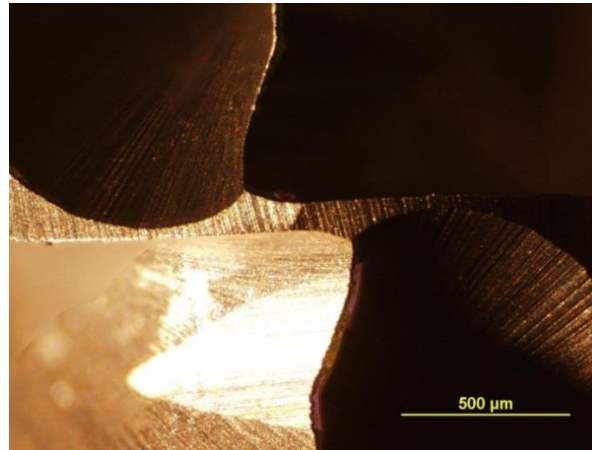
Absence of BUE and Tool Wear on the Cutting Edges of the Uncoated Ball End Mill  $\text{Ø}3.175\text{mm}$ , MQL, after Machining 10mm on 6061-T6 Aluminum Alloy and 20mm on 36A Low Carbon Steel.
